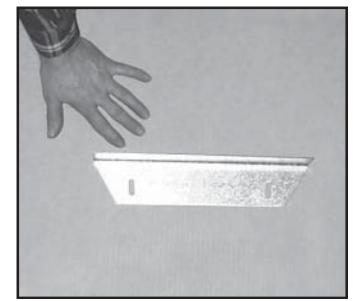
Plenum closure rear frame angle (rear door plenum angle).
